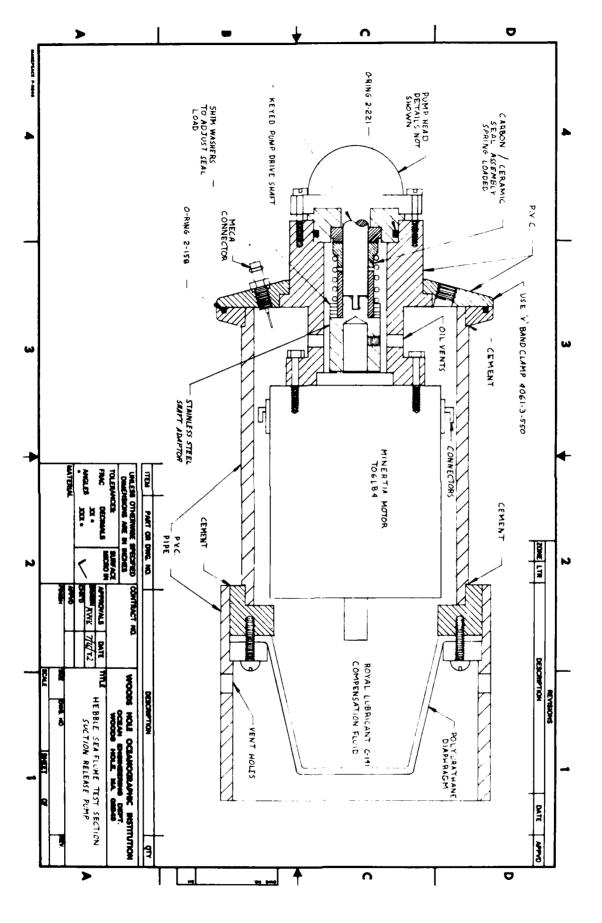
Cross Section of Typical Oil Compensated Motor Assembly.
